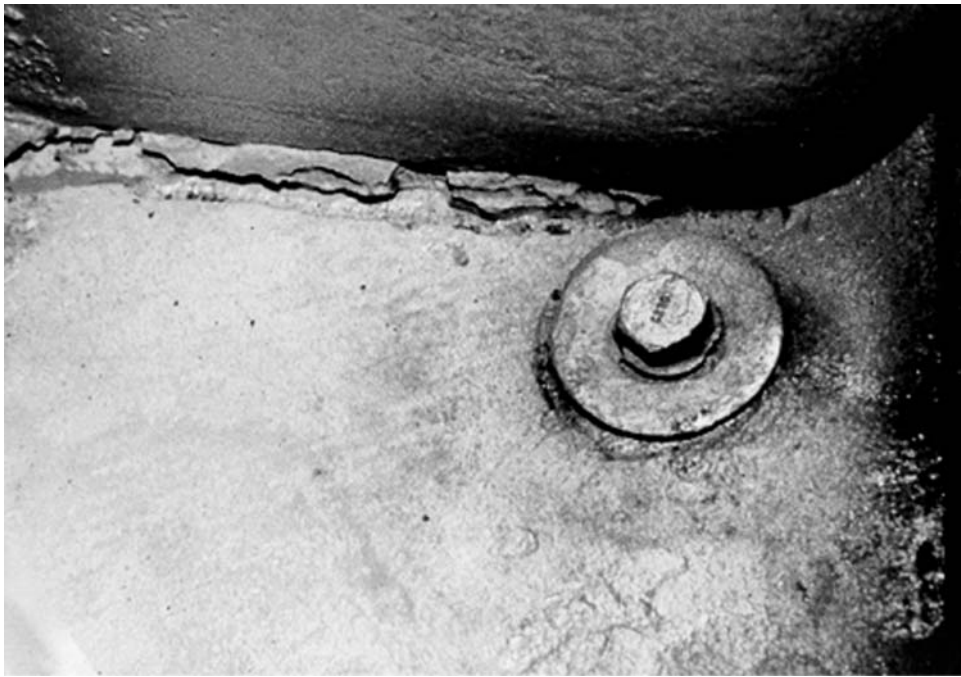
Corroded alloy C-276 weldment in FGD bypass duct
